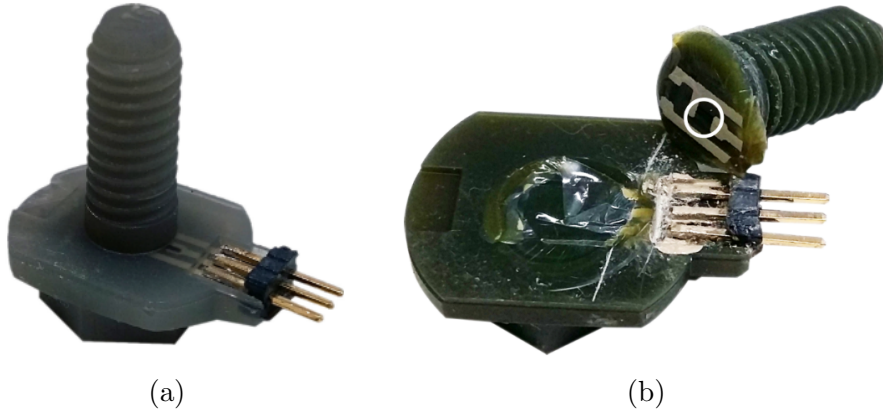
A smart screw developed using a multi-layer printing process [1]: a) Flex screw with an integrated sensor foil element; b) Screw sheared off at the position of the sensor and strain sensing resistor is marked with a white circle.
